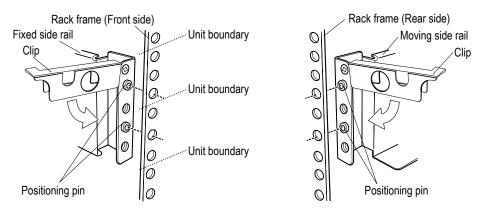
Installing Drive Box (2U) Installation Rails (for Circular Hole) - 1
